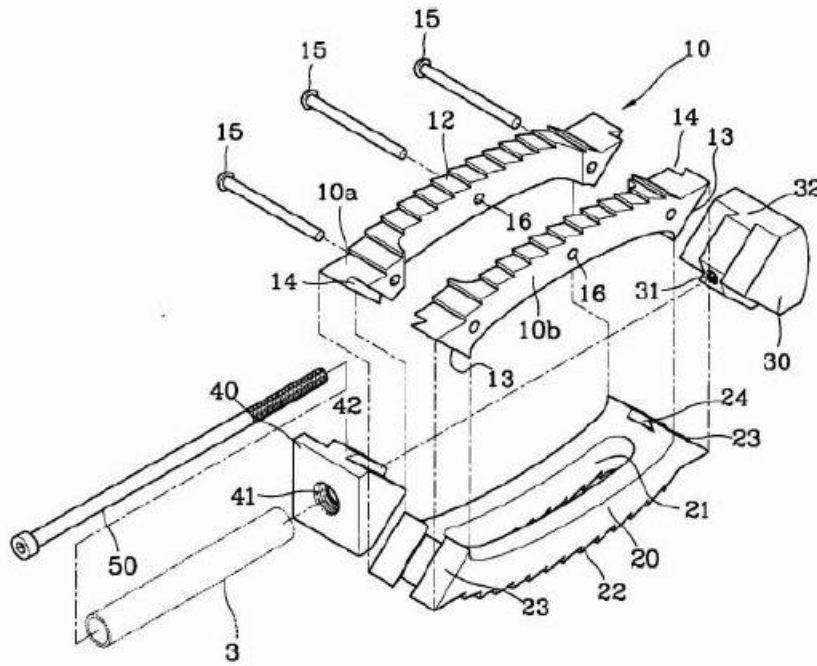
of Chung, reproduced above, depicts groove fastening screw 50, which fastens to screw hole 31 of lead wedge 30. *Id.* at 6. Opposing wedge 40 has penetrating hole 41, which has a raised spot to hold the head of groove fastening screw 50. *Id.* at 7. Tightening or loosening groove fastening screw 50 adjusts the distance between lead wedge 30 and opposing wedge 40, which slide along guiding surfaces 13 and 23 of holder bodies 10 and 20 to widen or narrow the space between the holder bodies. *Id.* at 6–7.
